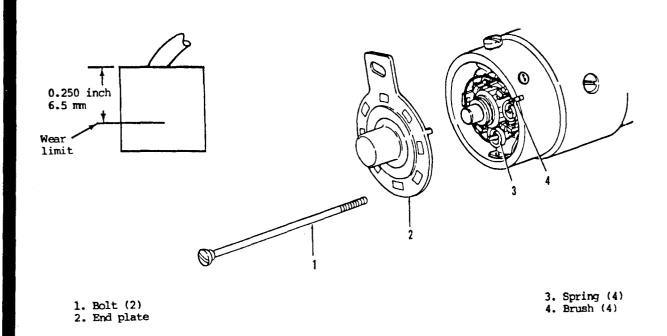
Inspecting Starter Brushes, Style I Starter
